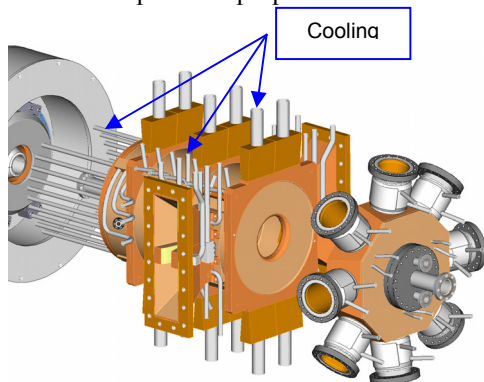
Exploded view of the photoinjector showing the cooling passages.
